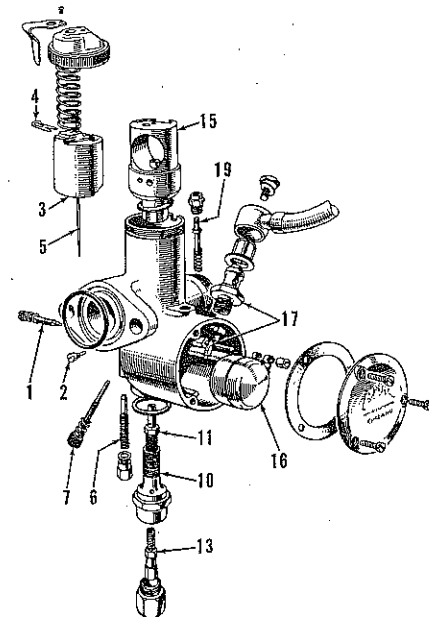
Exploded view of Amal carburetor typical of that used on T20 and T20C models.
